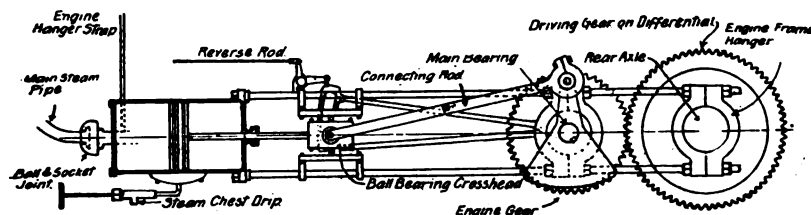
Sectional View of Engine and Transmission to Rear Axle.
